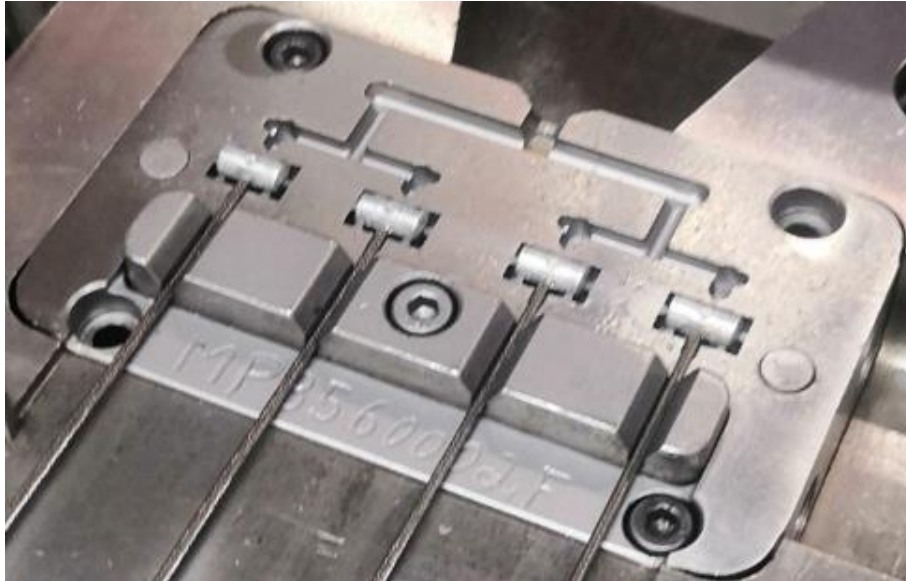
Cable end Fittings Positioned in Mold Before Plastic Injection
